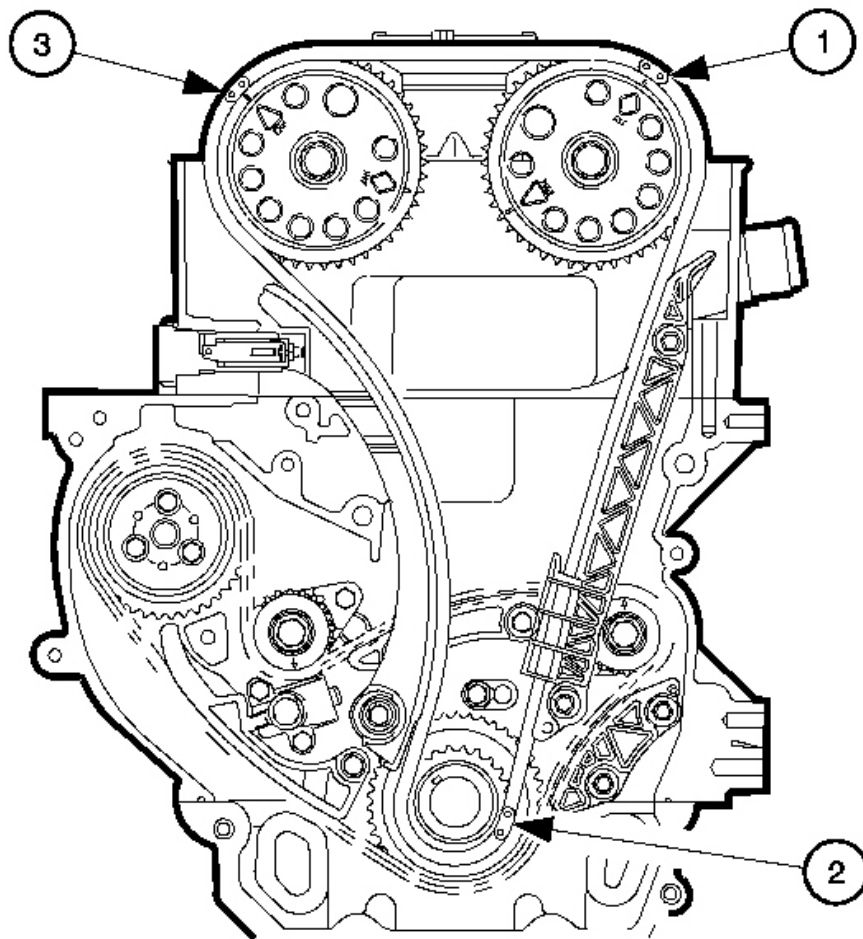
Verifying Crankshaft Sprocket & Exhaust Marks
